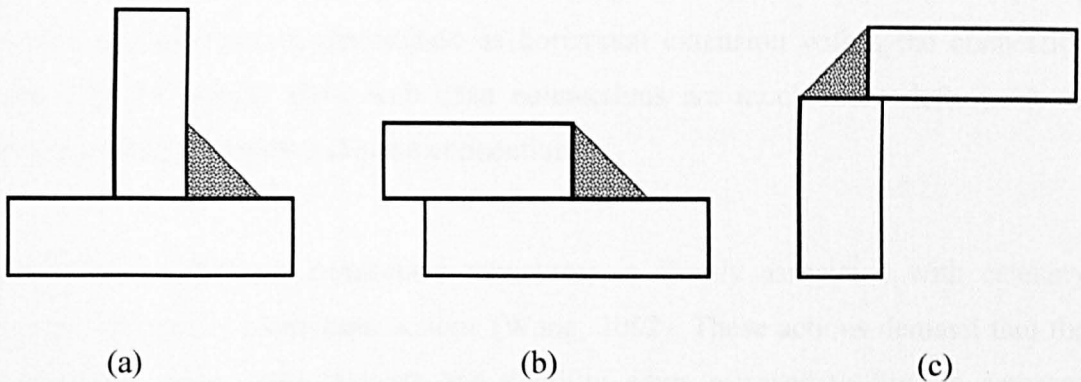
Fillet weld configurations (a) T-joints, (b) lap joints, (c) corner joints
